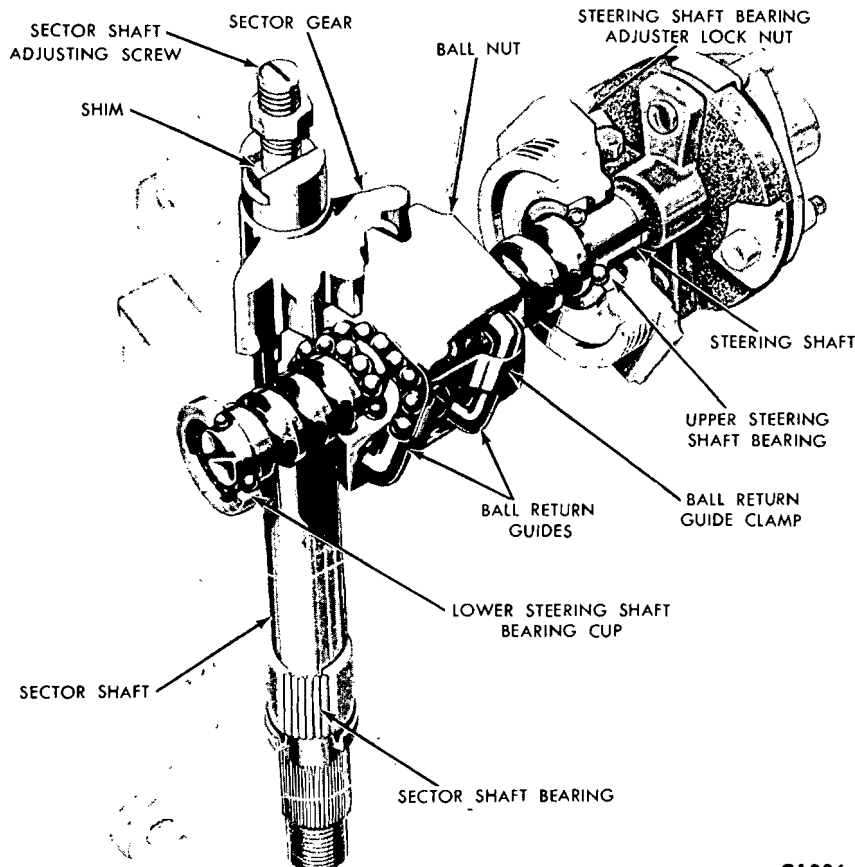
Recirculating Ball Type Steering Gear—Typical
